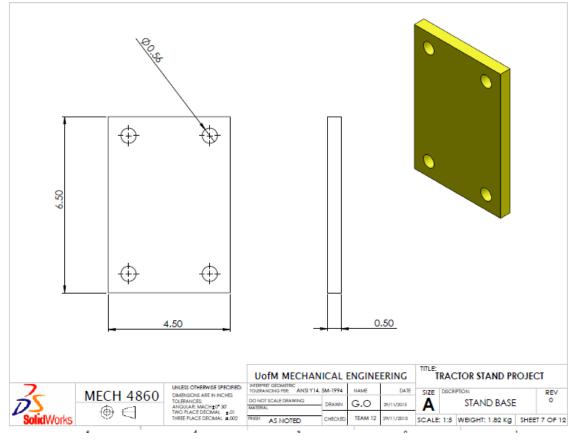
Drawing of final bottom plate design, with dimensions in inches.
